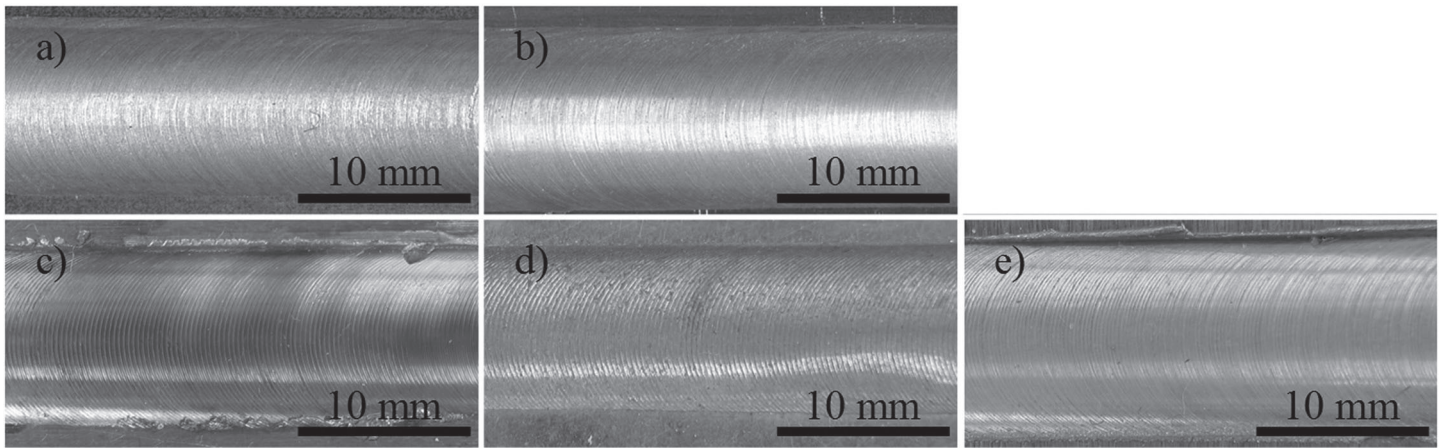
AA 5182-H111 (a), AA 6016-T4 (b), copper (c), brass (d) and zinc (e) friction stir welds.
